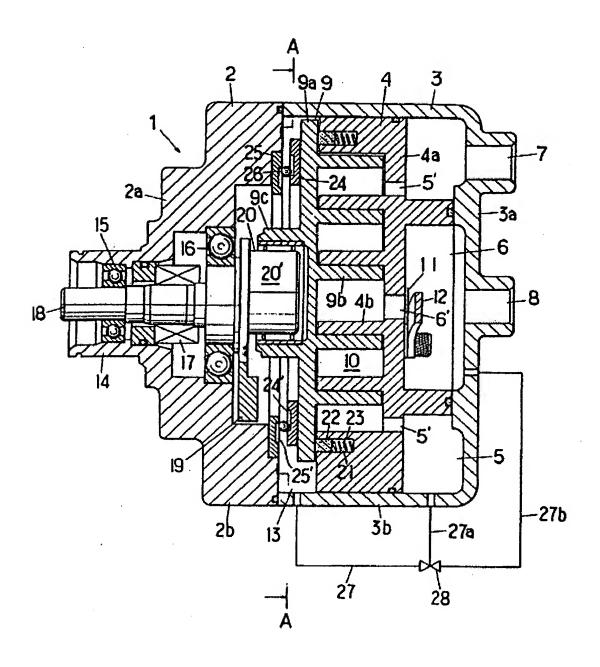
is a lateral cross-sectional view of a scroll compressor of the prior art with an automatic check mechanism using a ball.
